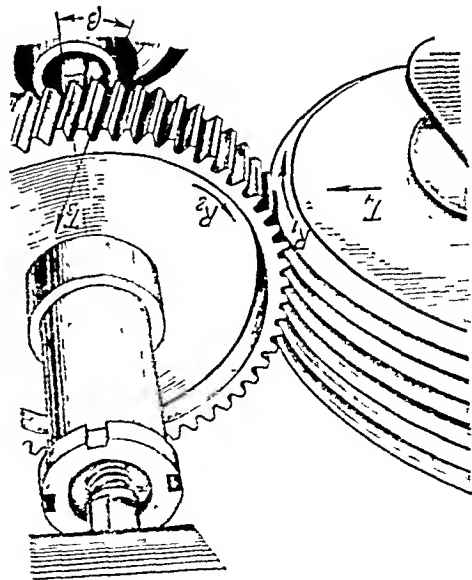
Operative motions of a gear grinder using a helically profiled wheel (model 5A833)
